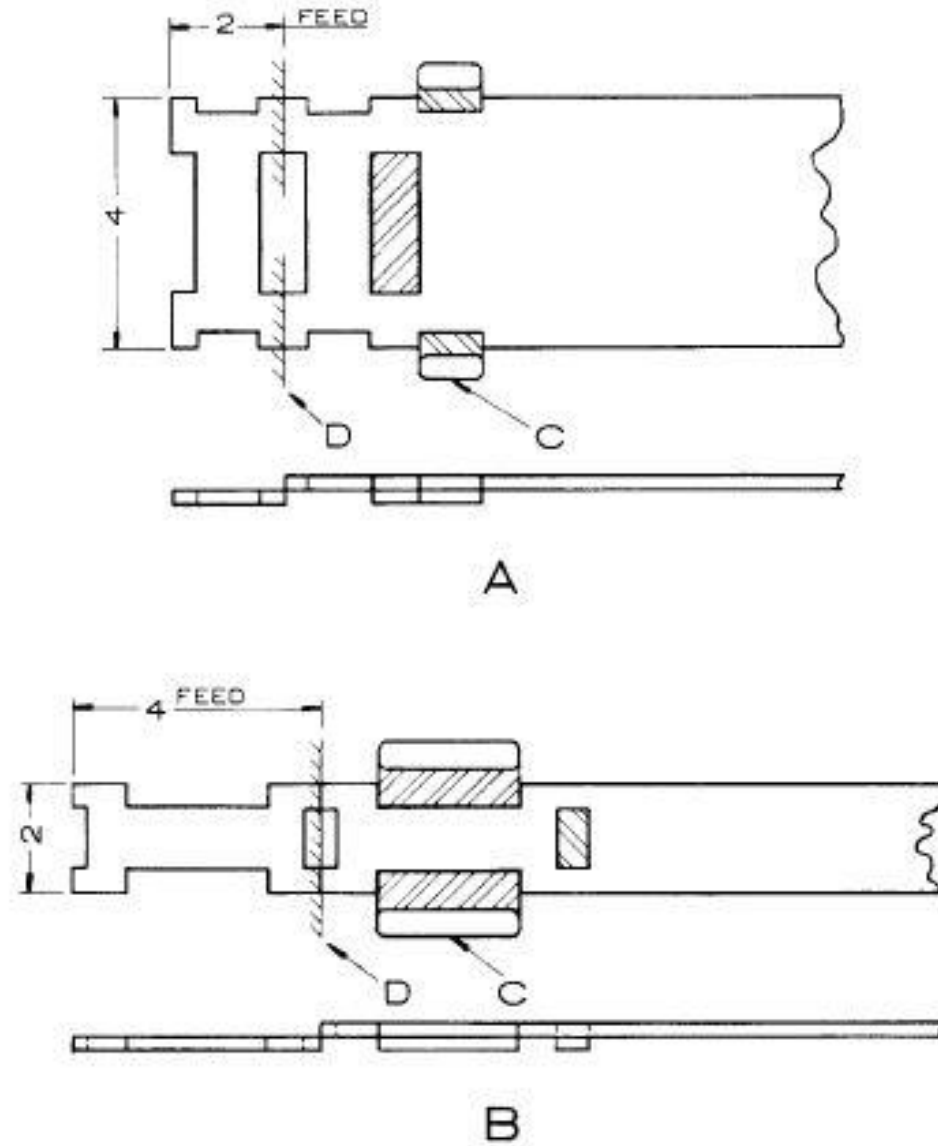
Blank layout for part shown in Figure 3.7 run, either the wide (A) or narrow (B) way.
